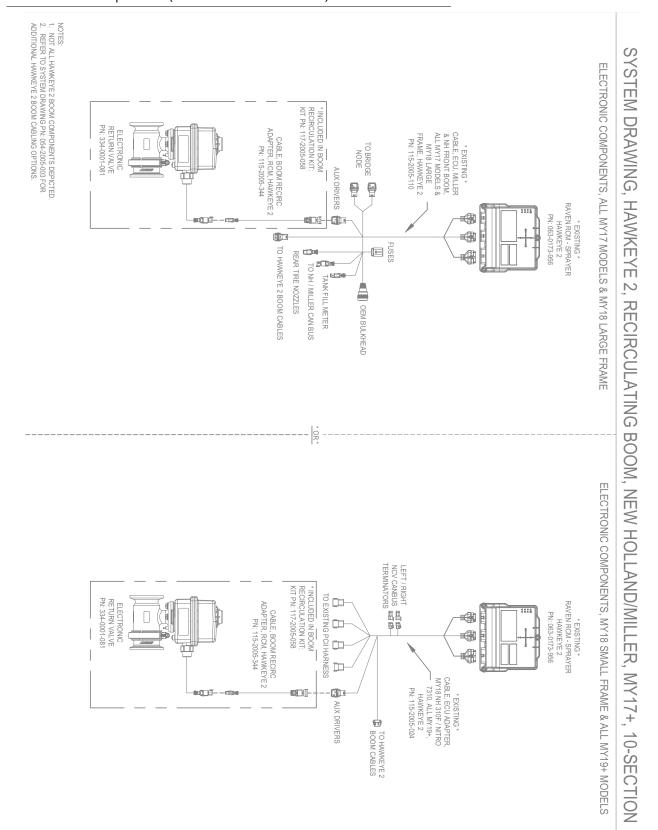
System Drawing, Hawkeye 2, Recirculating Boom New Holland/ Miller, MY17+, 10-Section, Electronic Components (P/N 054-2005-026 Rev. A)
